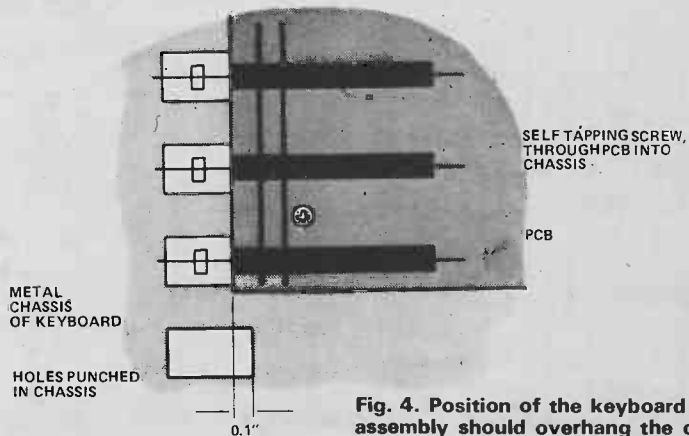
Position of the keyboard PCB. The assembly should overhang the chassis by 0.1".
